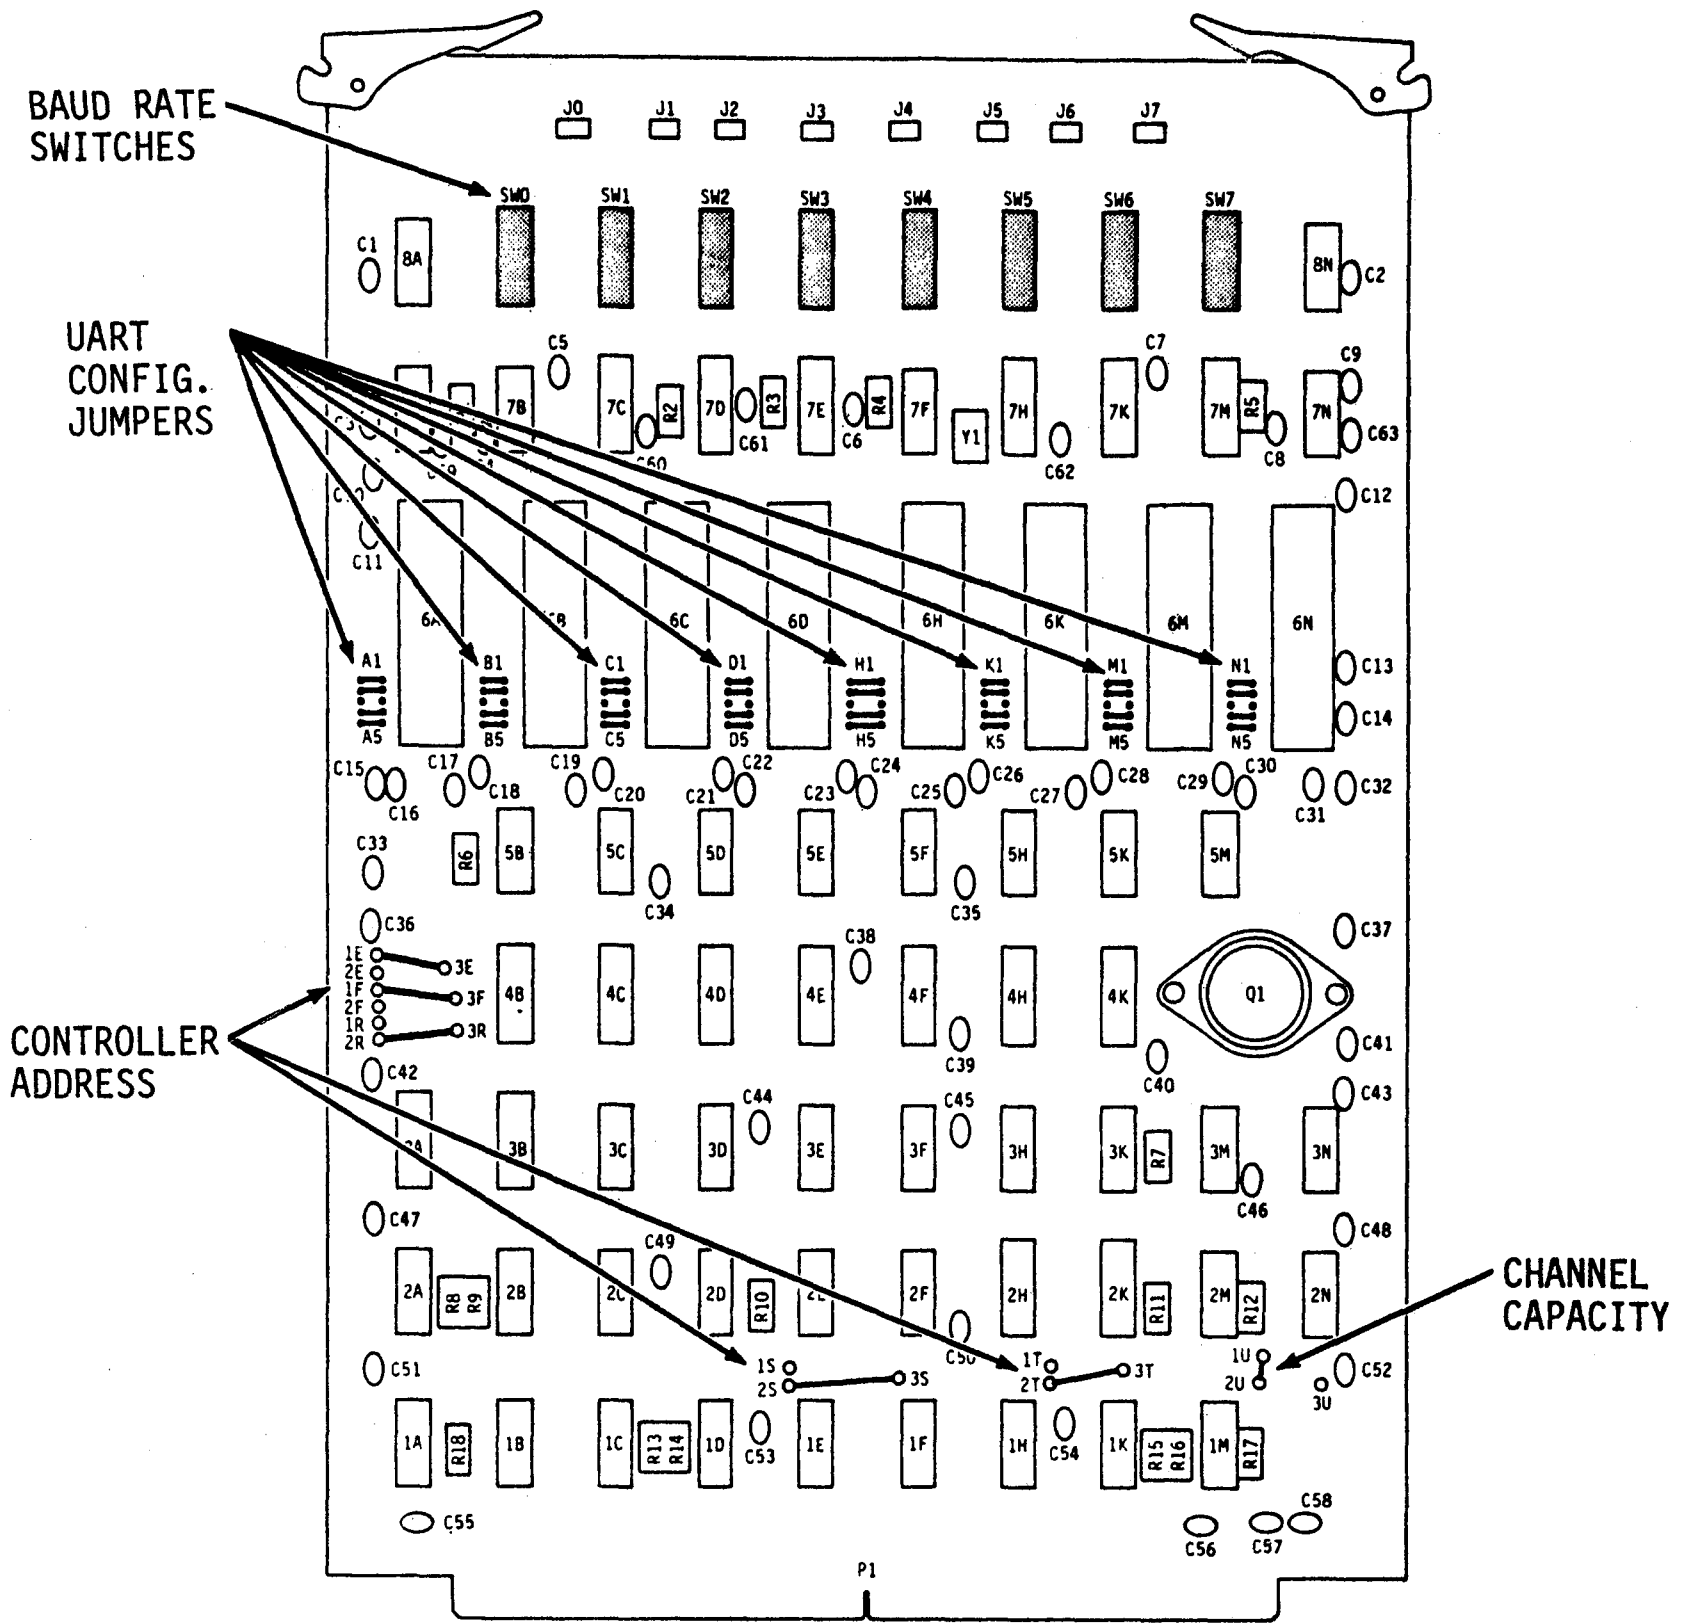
4-, 8-Way Channel VDT Controller PCB (P/N 901420)
